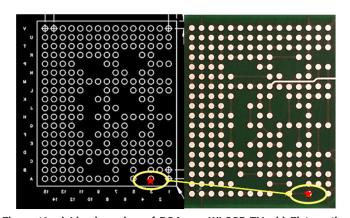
a) Live bug view of BGAs on WLCSP TV ; b) Flat section showing failed BGA for EB1 $\,$
